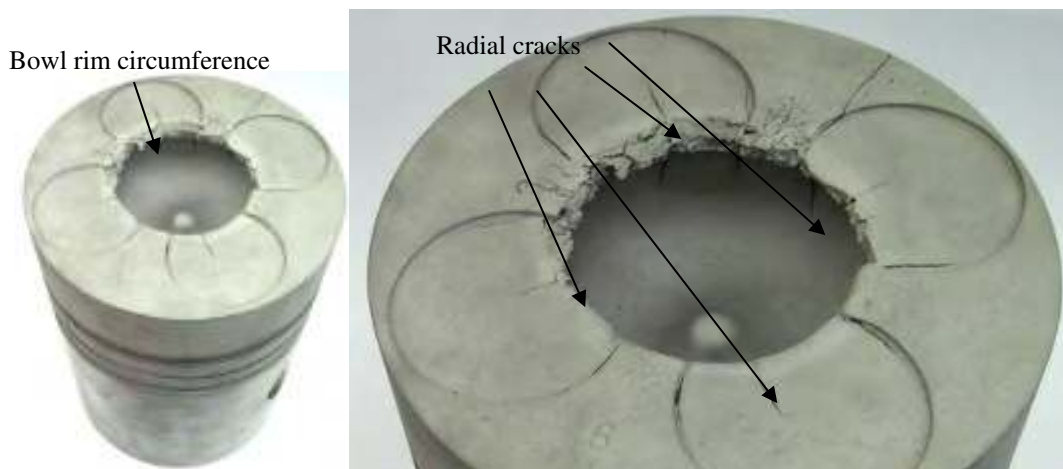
Train engine piston – piston damaged by thermal fatigue with creep [7, Minho Univ.].
